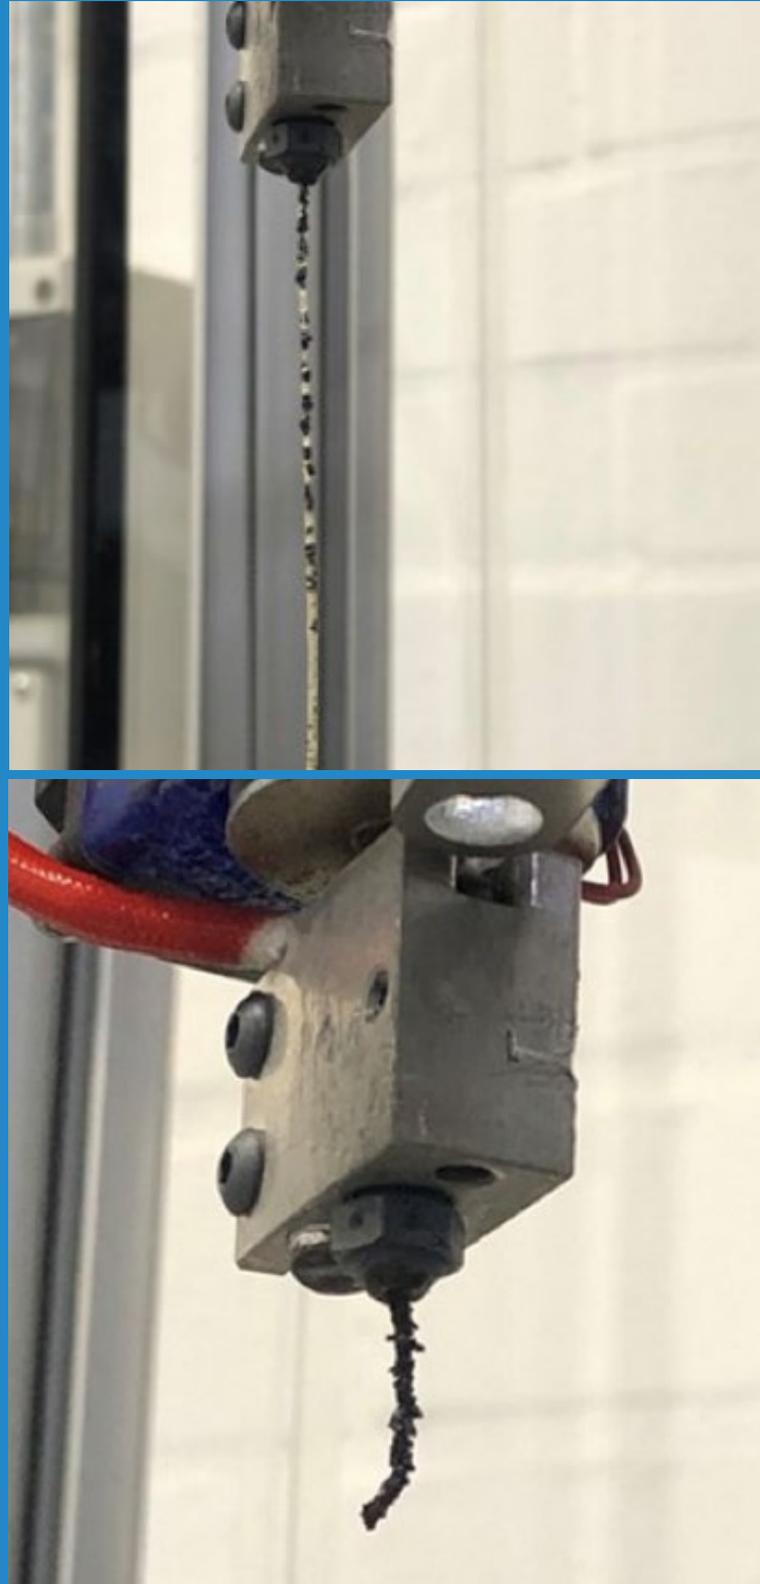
Examples of carbonisation in the extruded filament of a PAEK beige material
